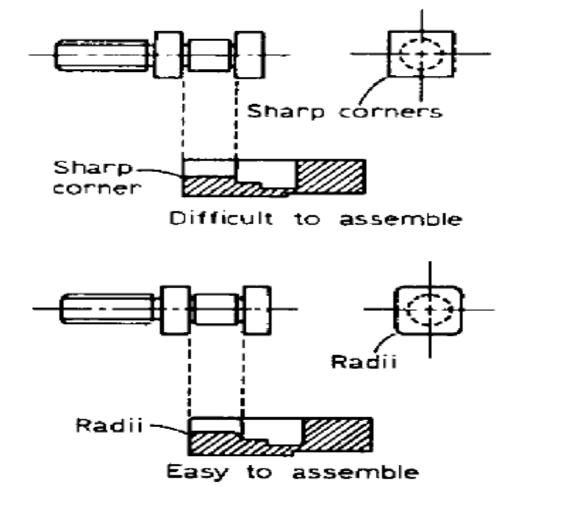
Redesign to assist assembly. (From Ref. 4.)
